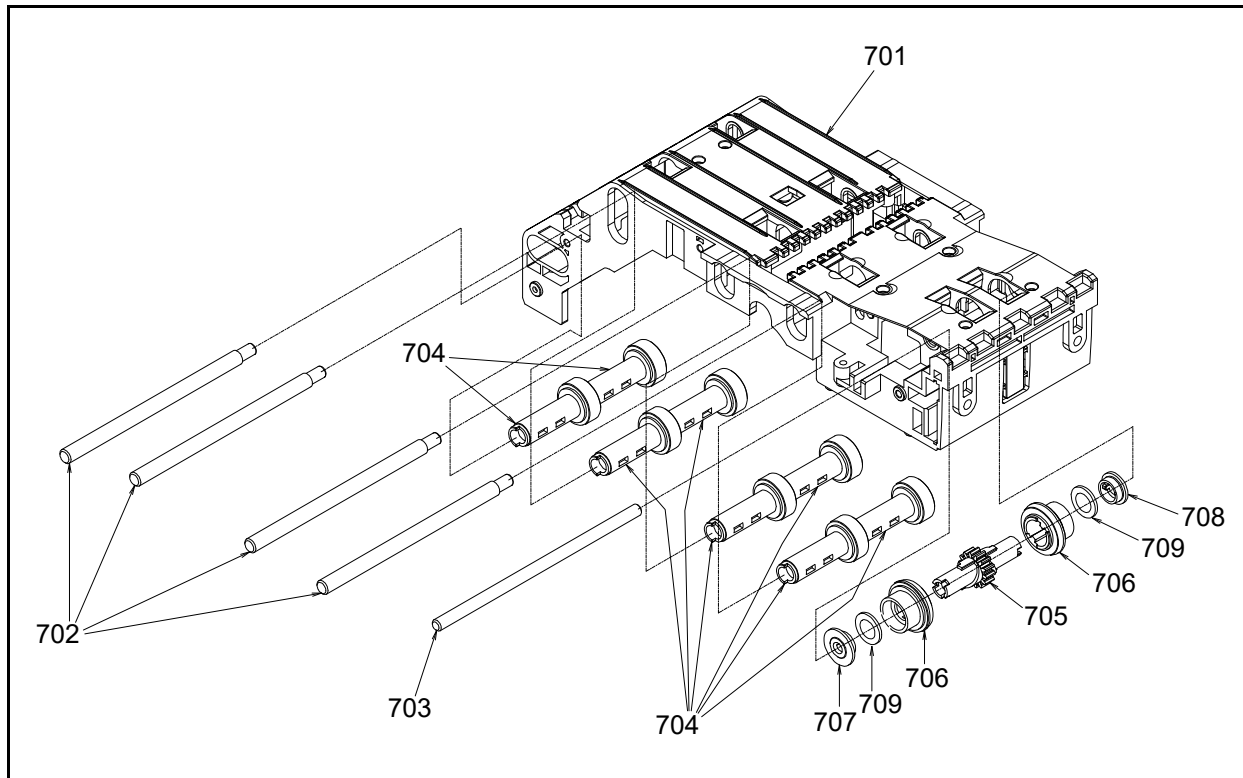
UBA Pro Transport Unit Exploded View 6
